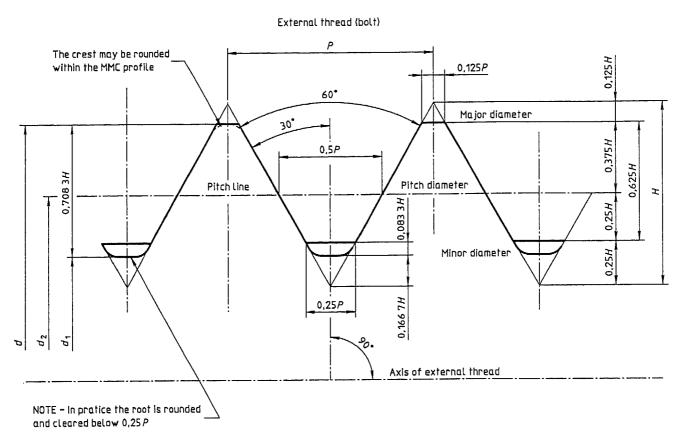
Unified external thread design profile (maximum material condition MMC)
